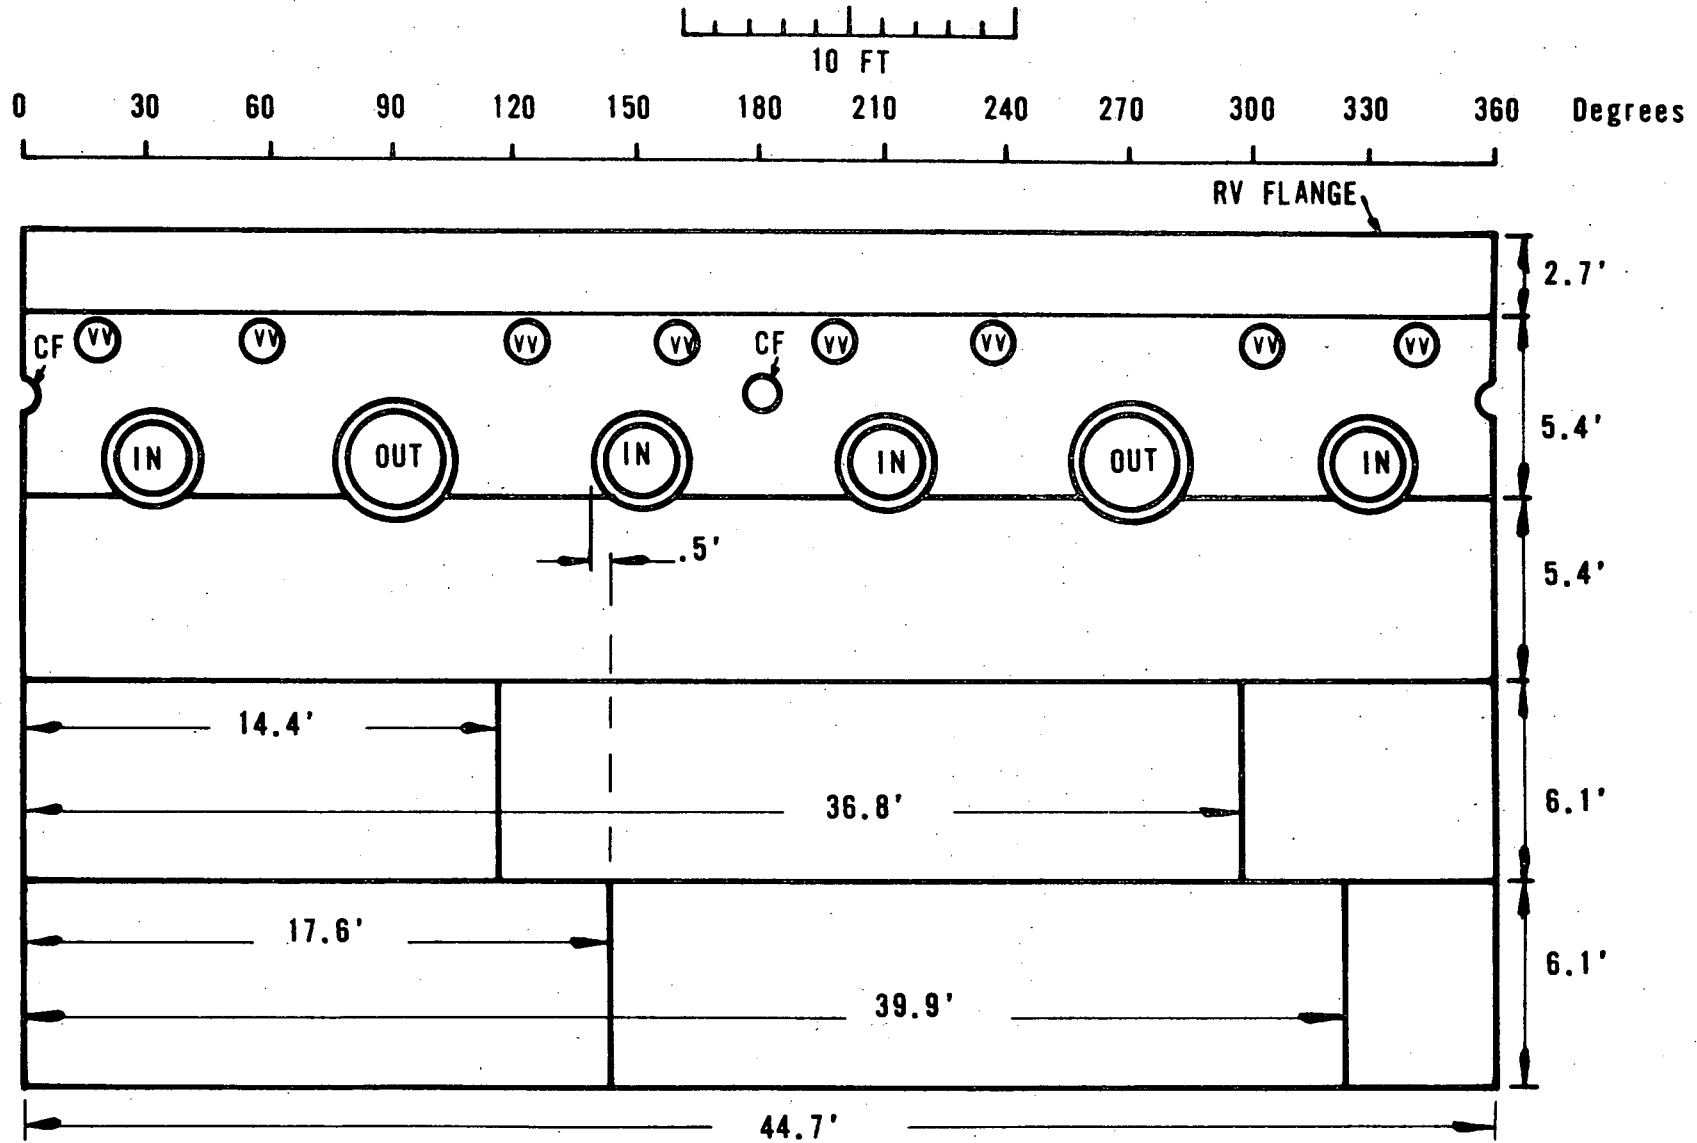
Crystal River 3 Inside Surface Reactor Vessel - Weld Locations of Interest
